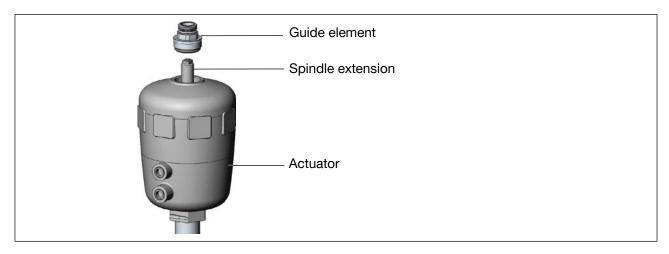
Installing the switch spindle for process valves belonging to series 26xx and 27xx; remove guide element and intermediate ring.
